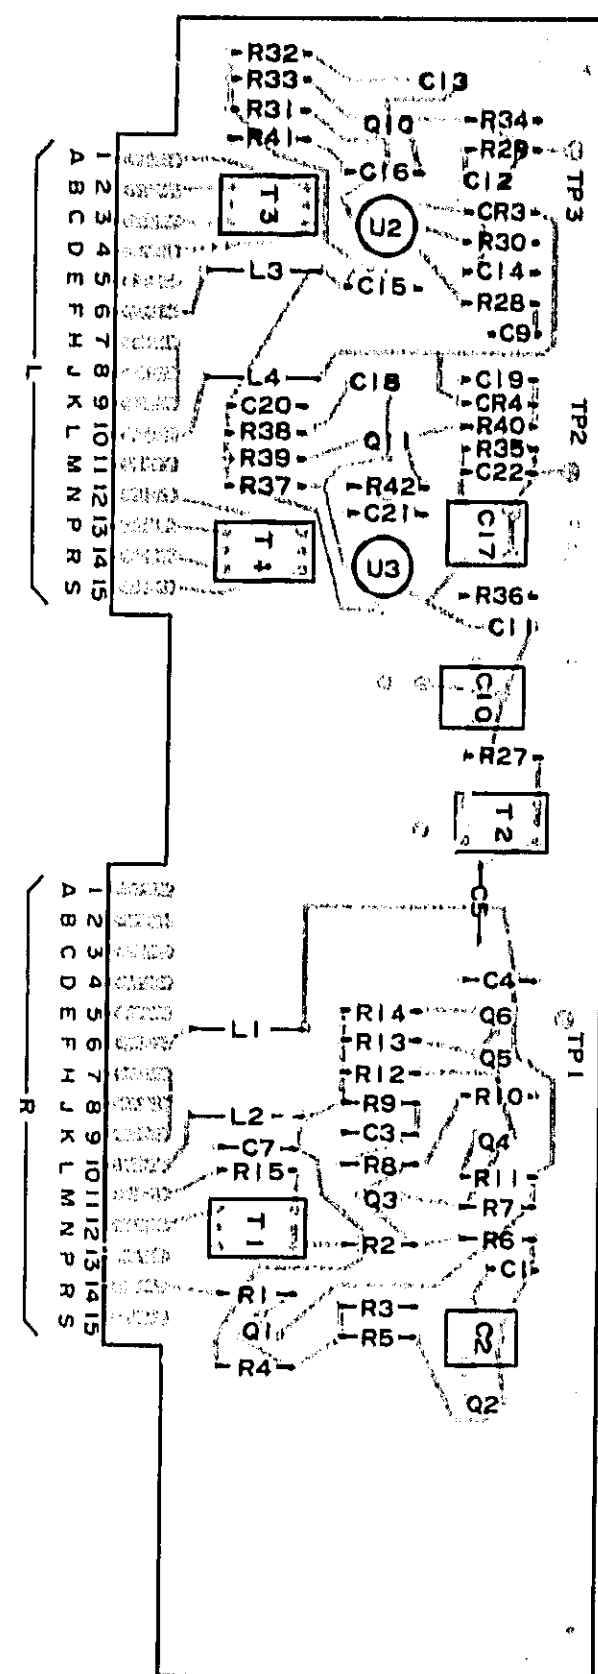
A5 Reference Phase Generator Board Assembly Component Locations.
